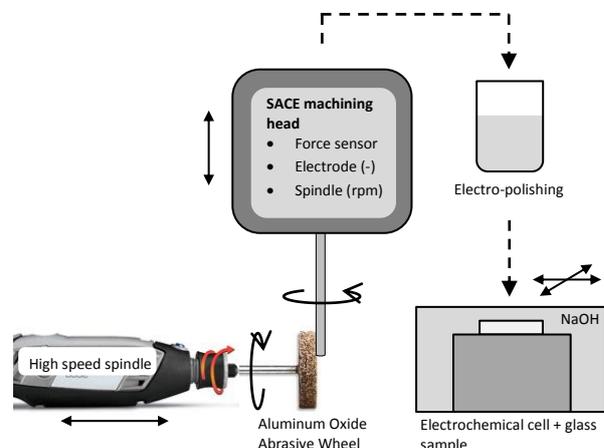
Integrated *in situ* microtool fabrication setup for glass micro-machining by SACE. Tool fabrication starts with mechanical grinding followed by electro-polishing. Hereafter, the tool is complete for glass micro-machining by SACE.
